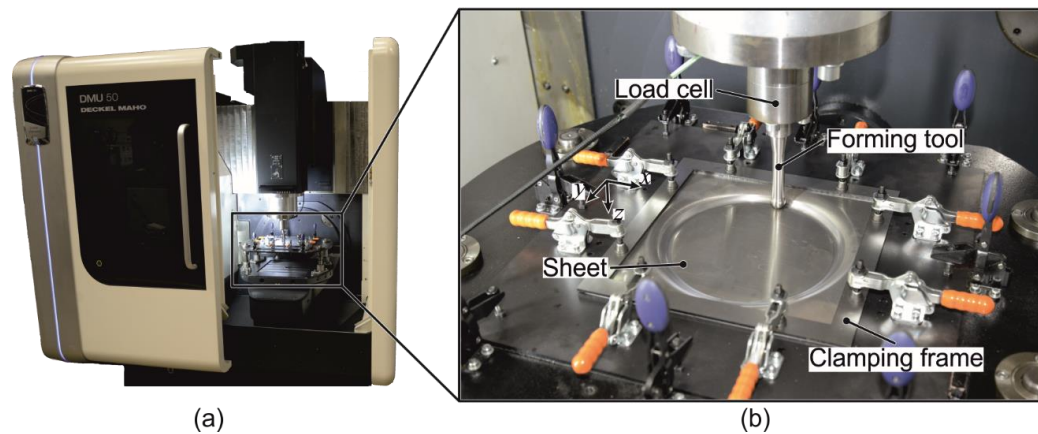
Experimental process setup: (a) 5-axis milling machine with (b) single point incremental forming experimental setup.
